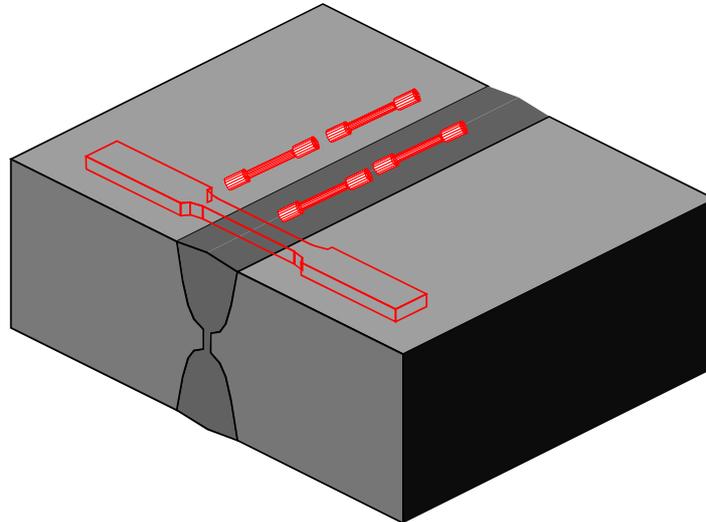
View of testing coupon with double "U" weld metal and specimens sampling [6]
